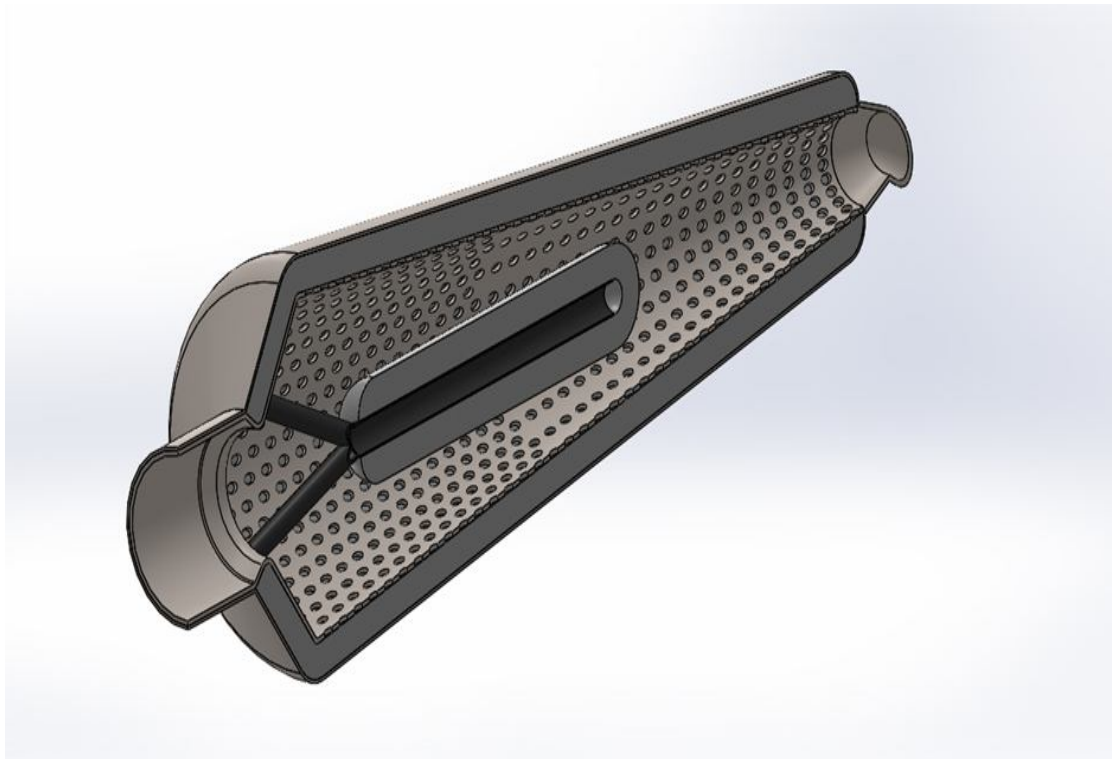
Design assembly of the exhaust muffler (Sectional View)
